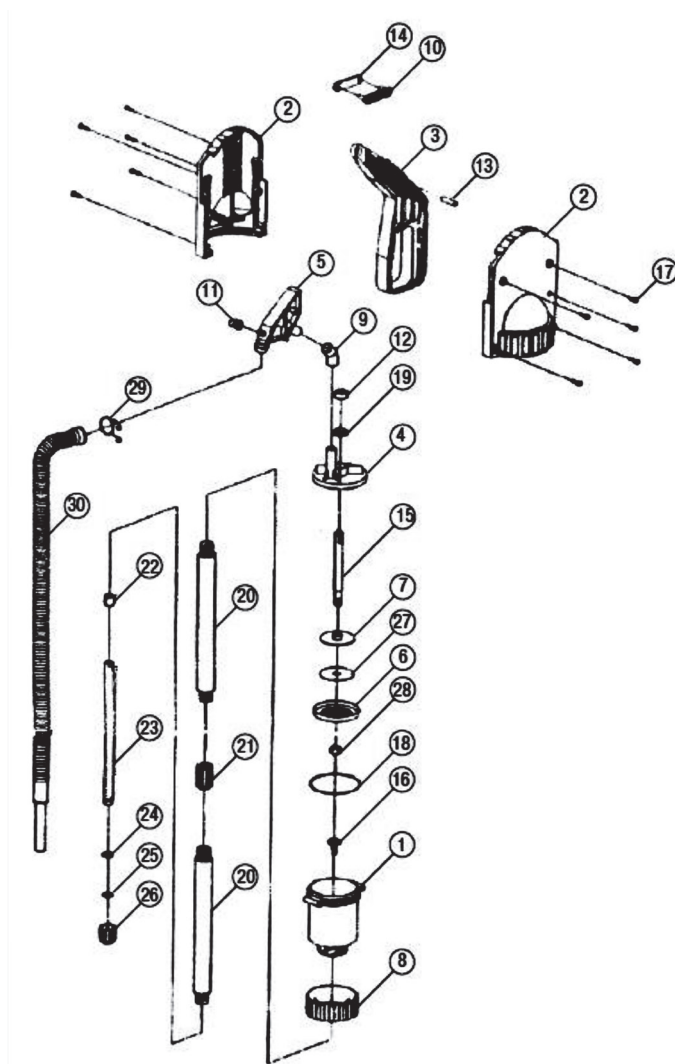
1: Exploded view of the barrel pump for AdBlue®
